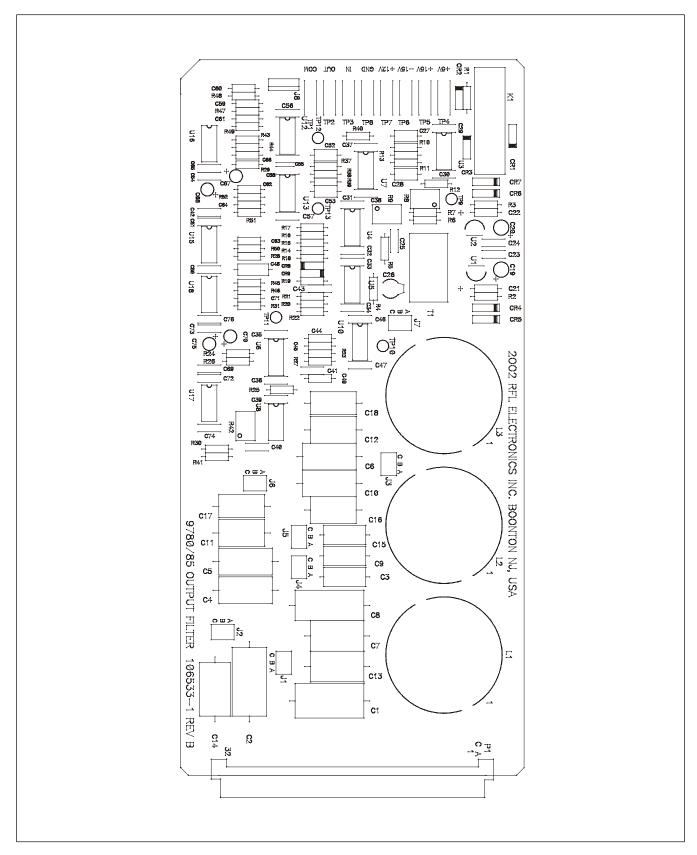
Component Locator Drawing, RFL 9780 Output Filter Module (Assy No. 106530-11 to -15)
